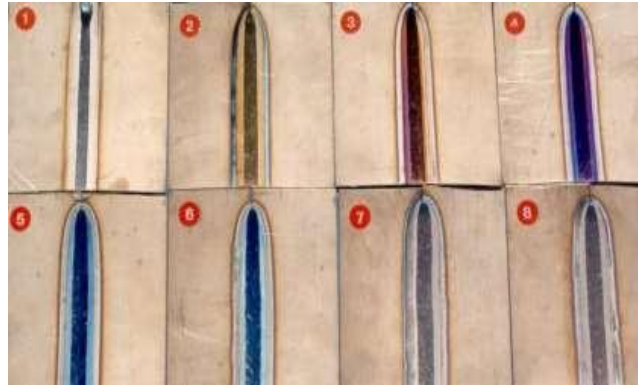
WIG welds in titanium sheet made successively by progressive contamination of shielding gas with air
